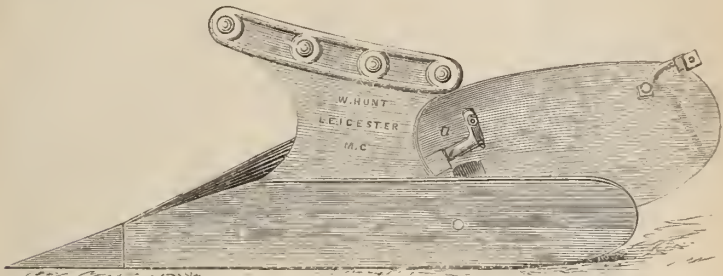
View of inner surface of Mouldboard, showing the rod fastenings for the Share.
